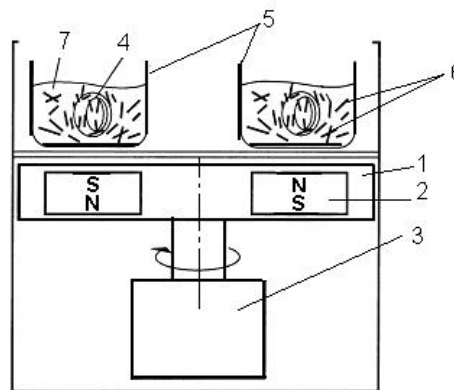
Removal of small burrs using MAF by T.Shinmura's method
